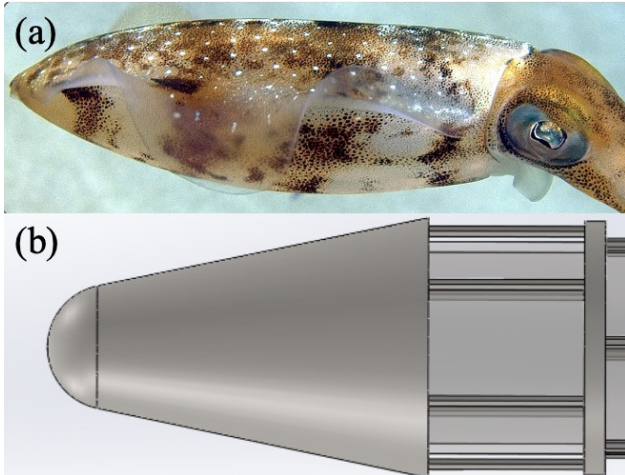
Head inspired by submarine: (a) head of a squid [18] (b) head of the AUV
